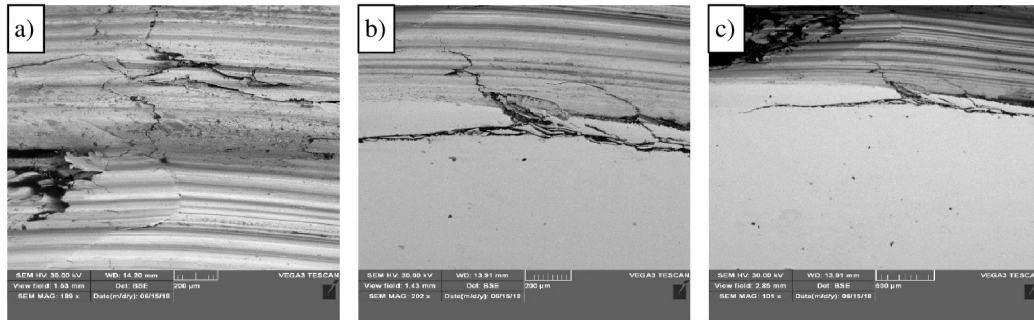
Analysis of zone I for a tool which produced 900 forgings
